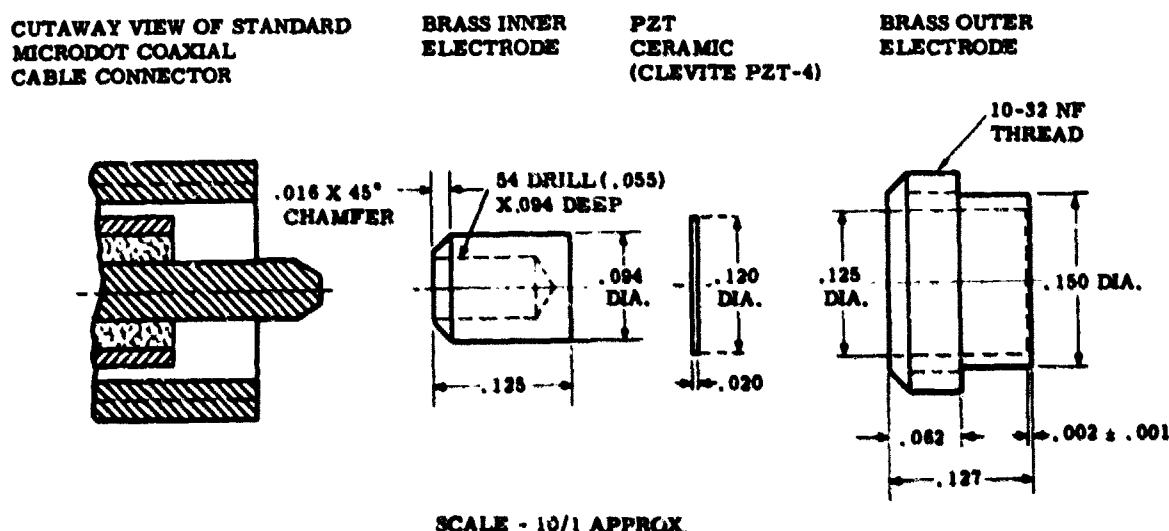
Assembly Drawing of PZT Shock Wave Detector
